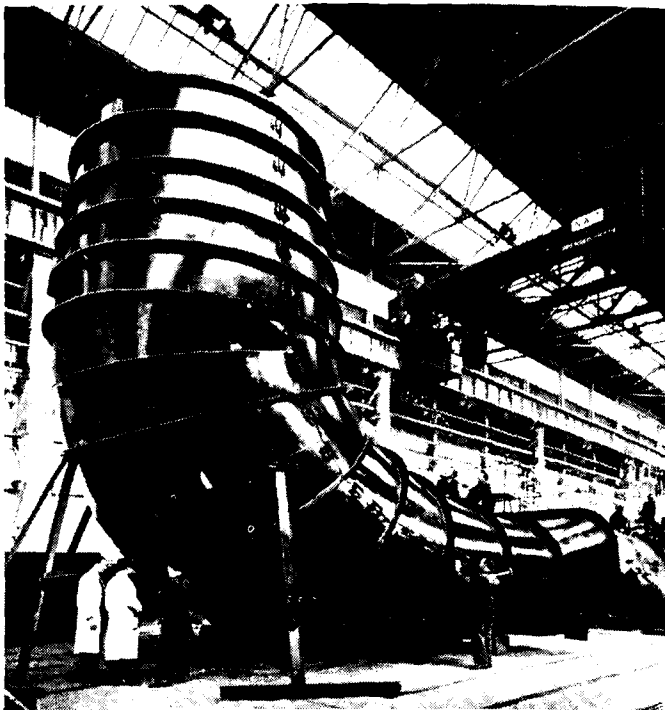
Works assembly of fabricated steel draught tube for Rihand.
